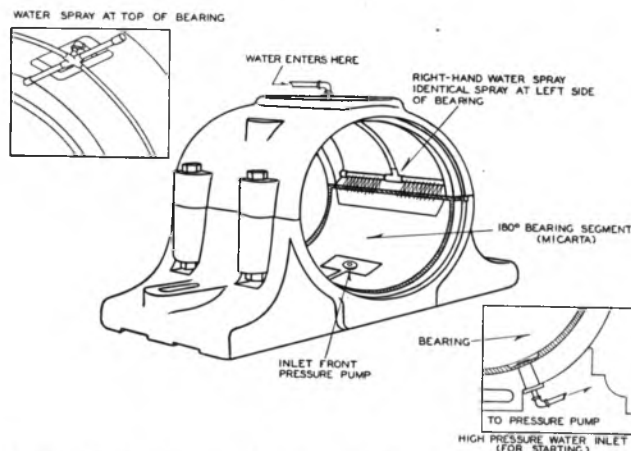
TYPICAL WATER-LUBRICATED MICARTA BEARING FOR BALL AND ROD MILLS
